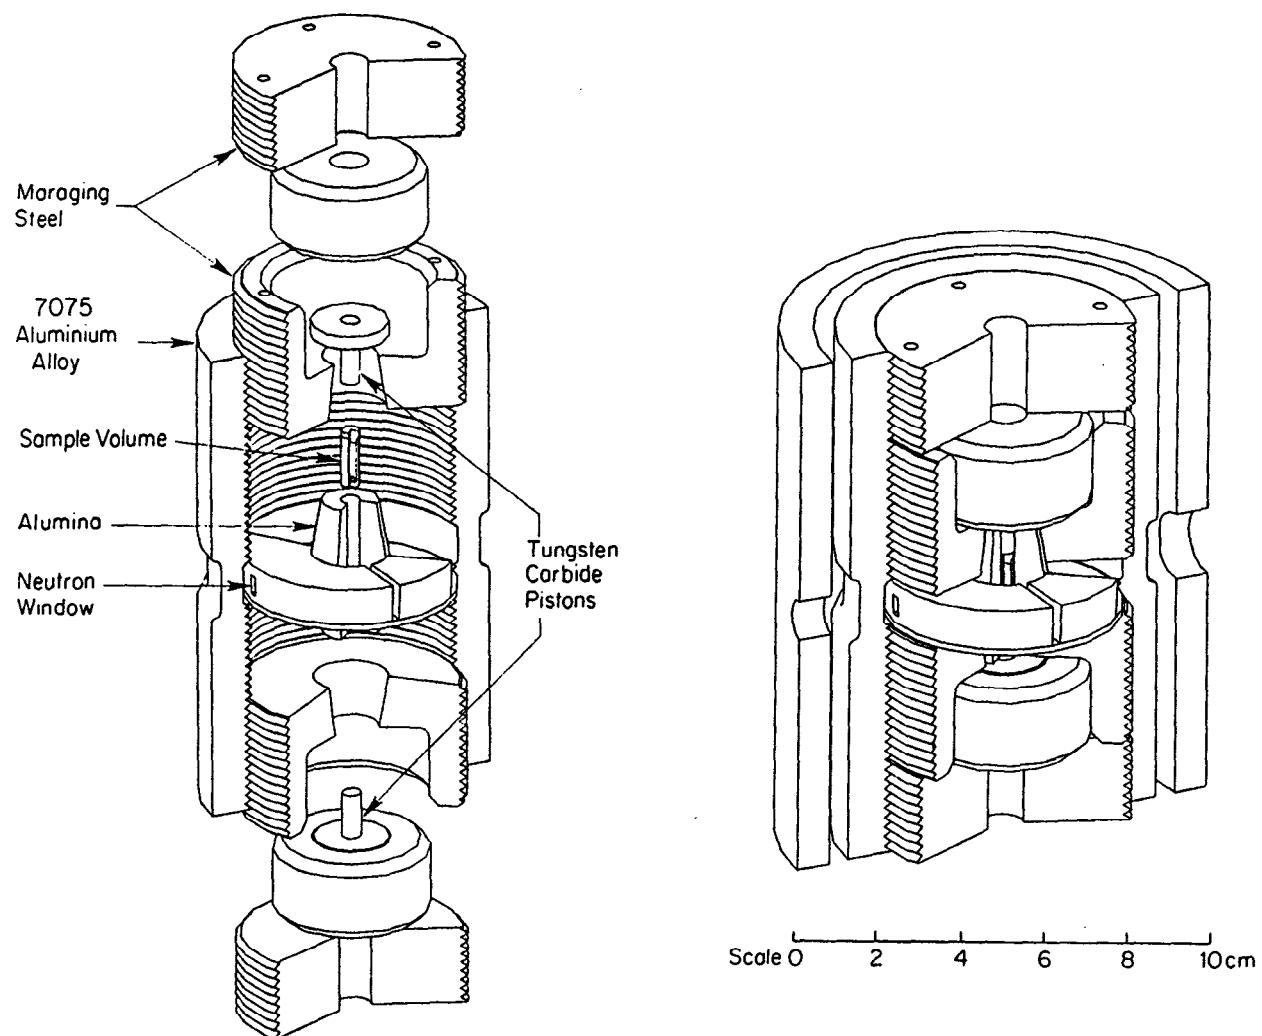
An exploded and assembled view of the McWhan clamped pressure cell.
